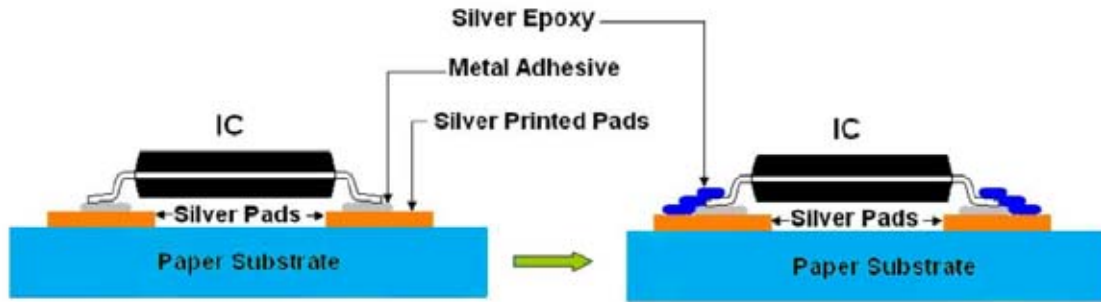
Assembly process for components on printed pads using the Epo-Tek silver epoxy.
